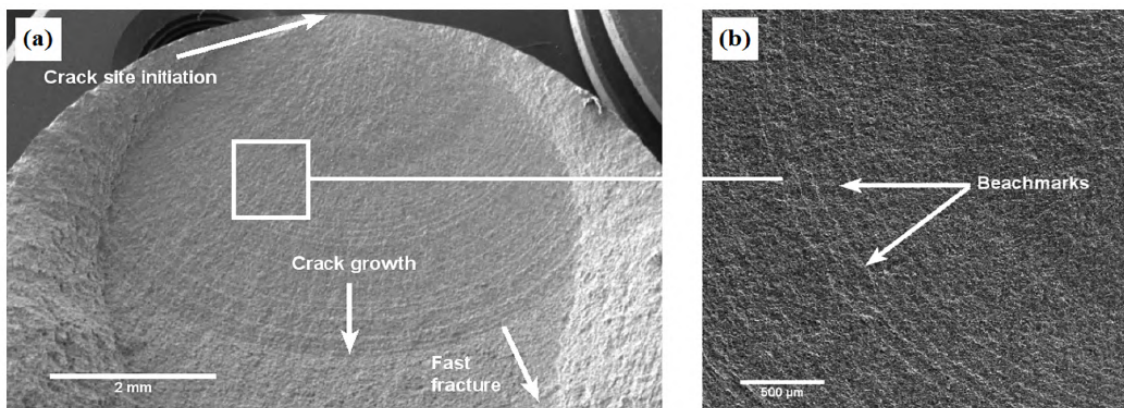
Fracture surface of annealed Inconel 625 showing stable crack growth region by fatigue and the presence of beachmarks [58].
